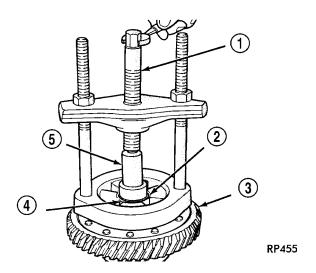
Remove Differential Bearing Cone from Ring Gear Side
